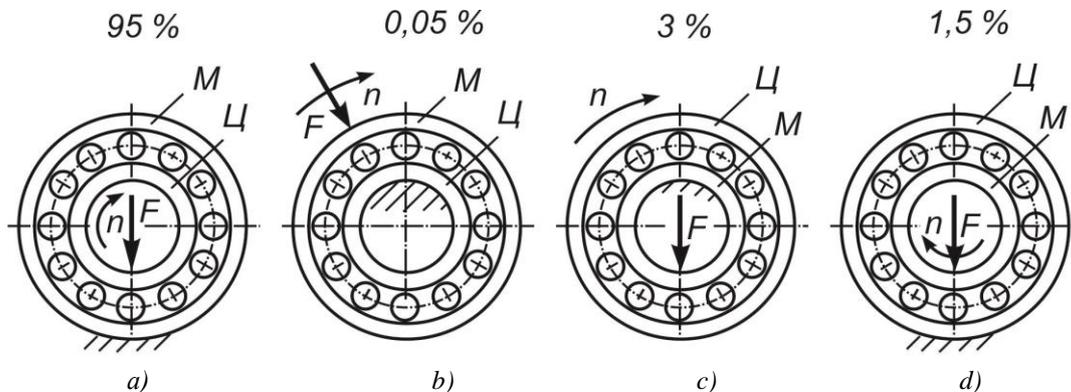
Types of mountings of rolling bearing rings: L – local; C – circulating; F – radial force; n – direction of ring rotation
